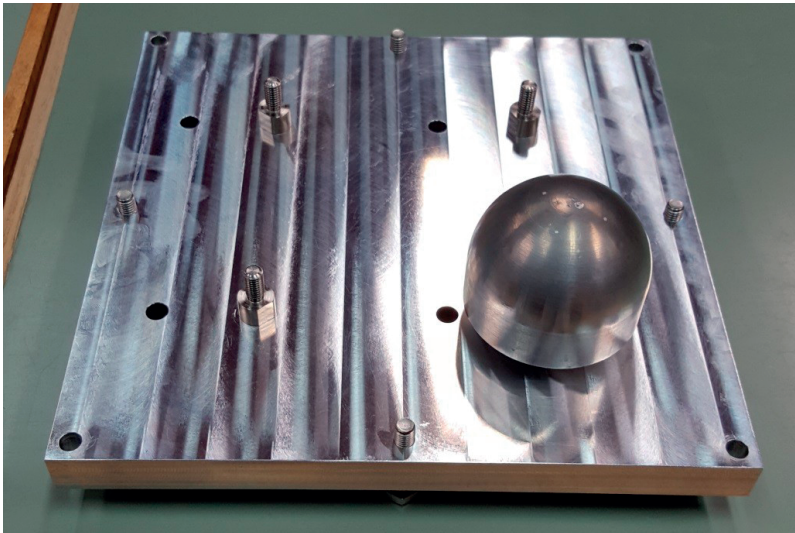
Mould for large size electrodes, top part, one electrode mounted.
